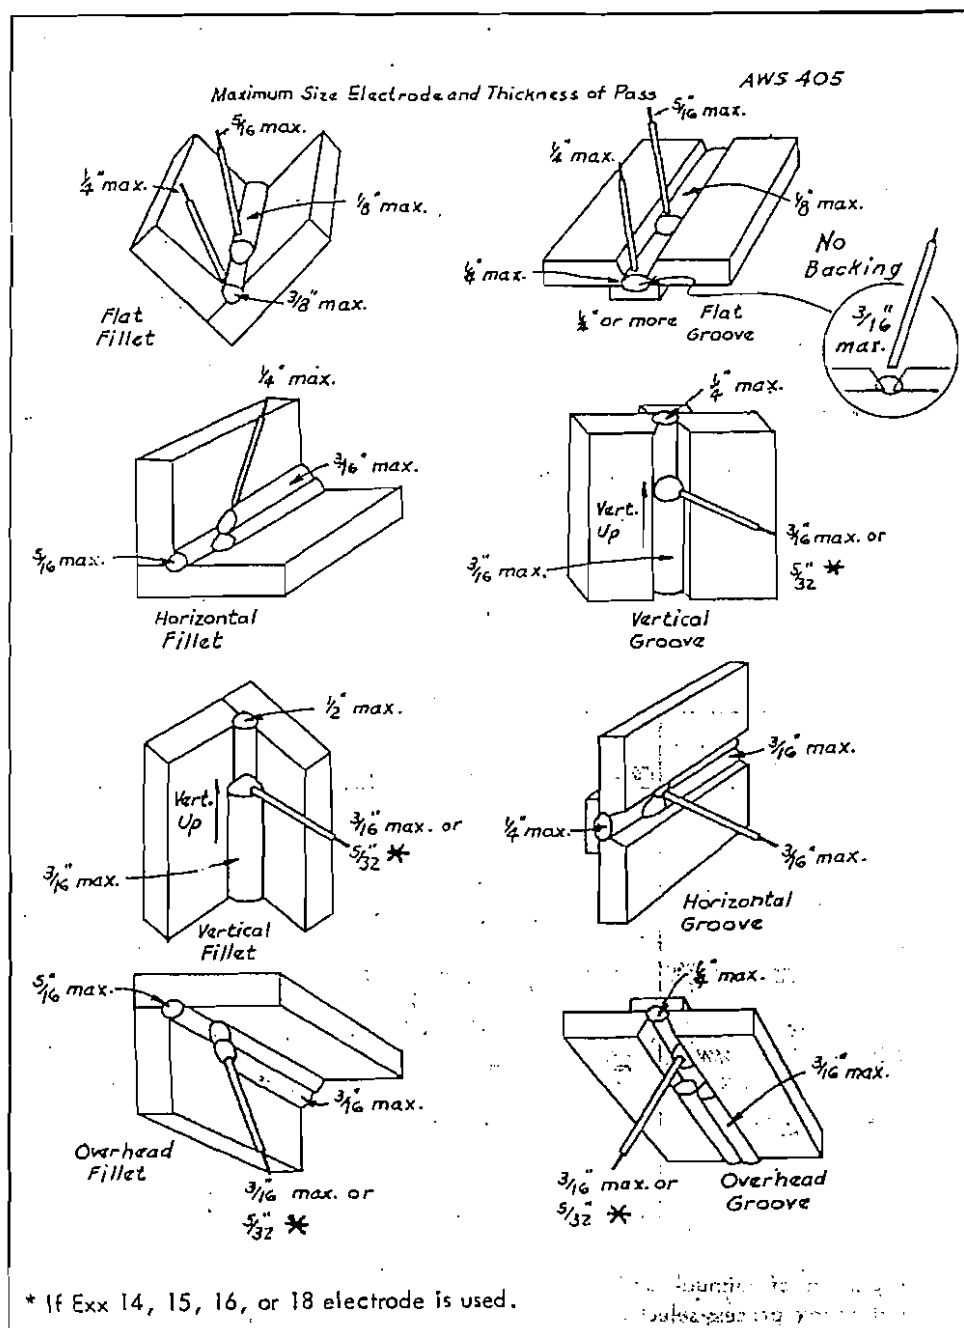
The code book places specific limits on electrode size for specific joint designs and weld positions.
